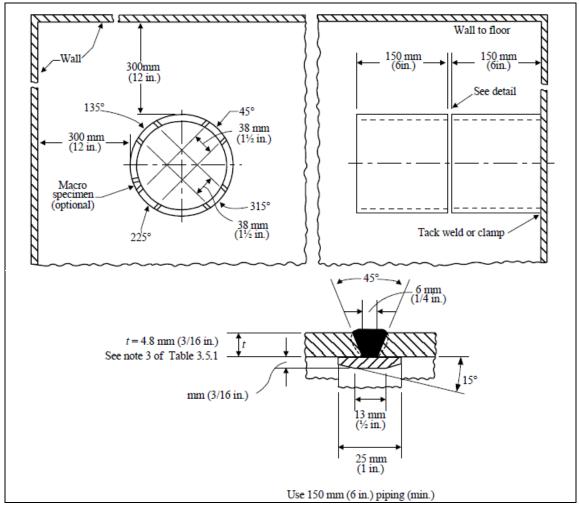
C: Welder Qualification Test No. Q3R (also Refer Table 3.5.1)
